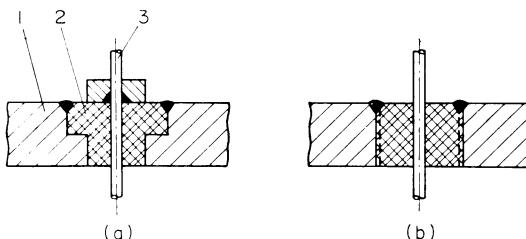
Waxed electrode seals: (a) double seal; (b) single seal
